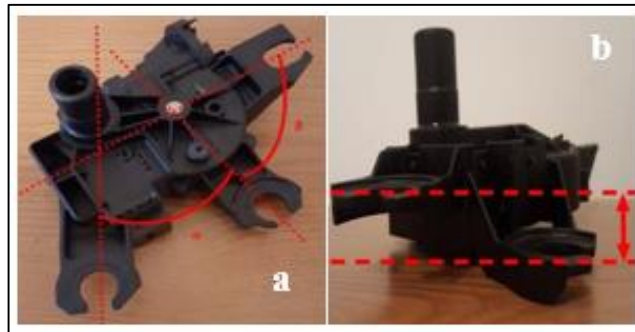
a) Angular adjustment for parts assembly / b) Vertical displacement
